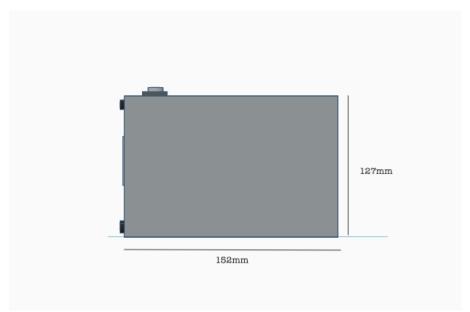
Length and Height Dimensions of Rangefinder Enclosure
